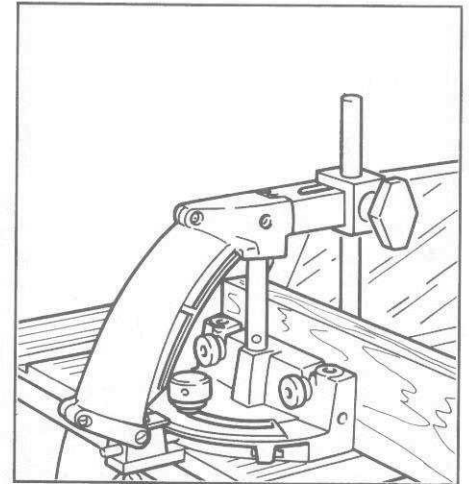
The miter gauge protractor has two slots, so that you can attach a miter gauge extension.
